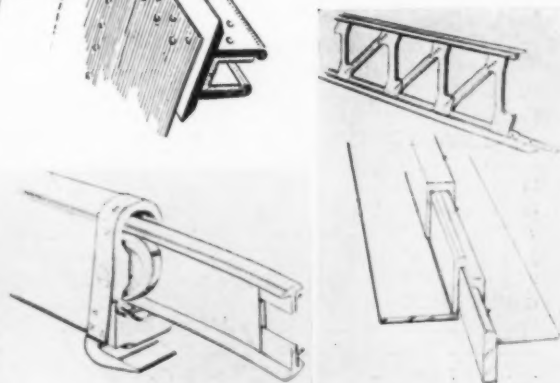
Application of extruded aluminium alloy section for wing spar flange construction.
